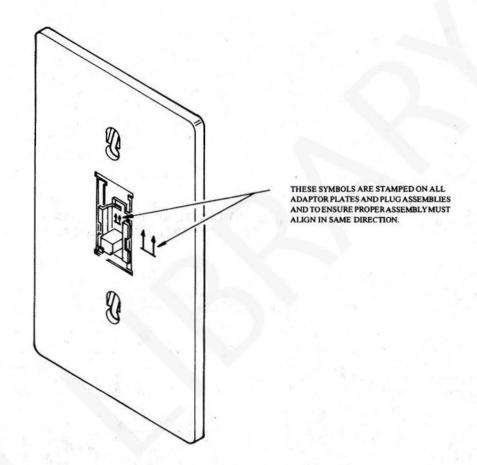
Typical arrangement of adaptor plate and plug assembly.
